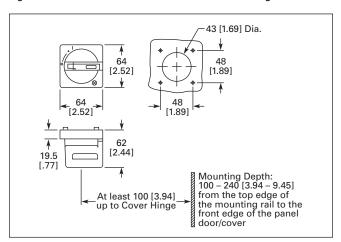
Rotary Handle Mechanism — XTPAXRHM... (Approximate Dimensions in mm [in])
